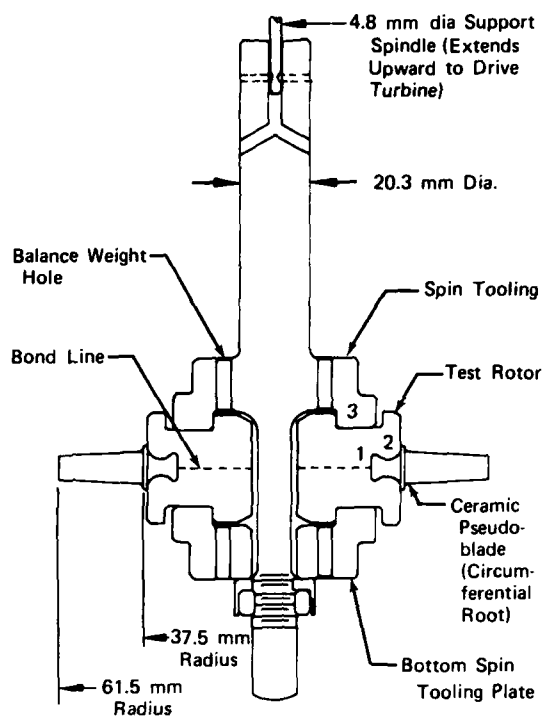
Spin Tooling and Rotor Assembly of Phase II
